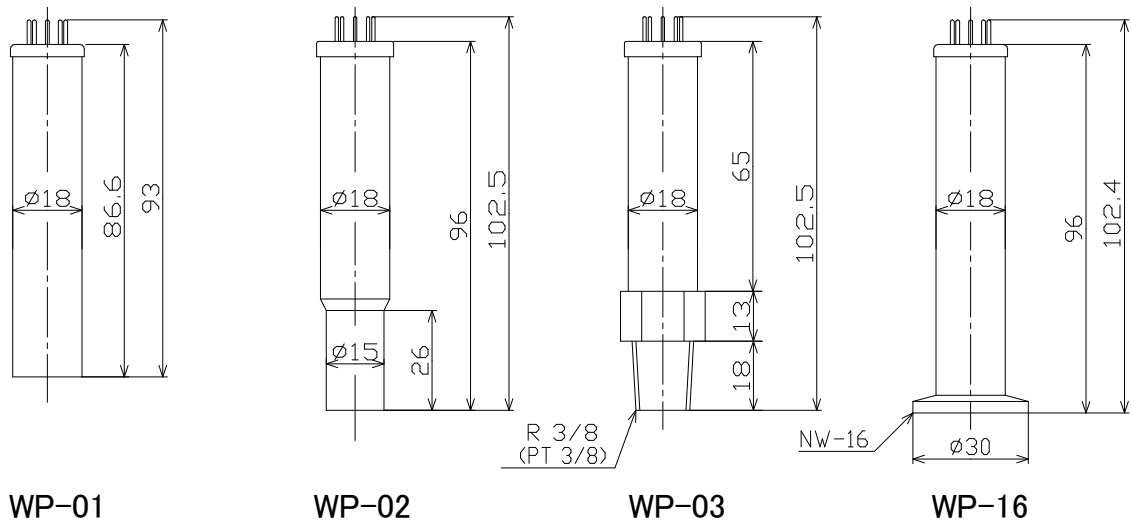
Dimensional drawing for measuring unit GP-BH
